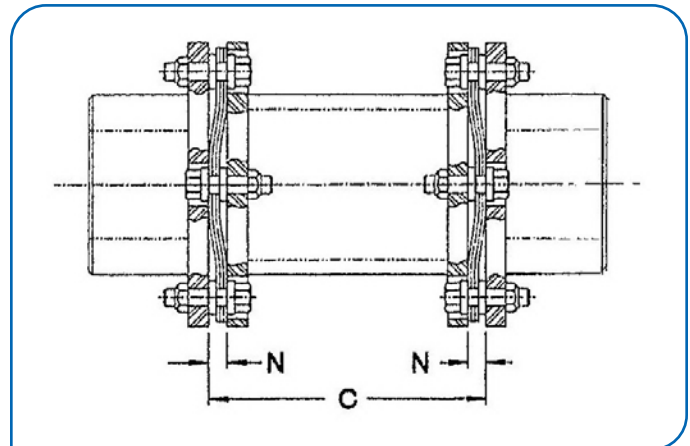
The disk pack is wavy and the dimension "N" between flange faces is smaller than indicated on the installation instructions or applicable assembly drawing.
